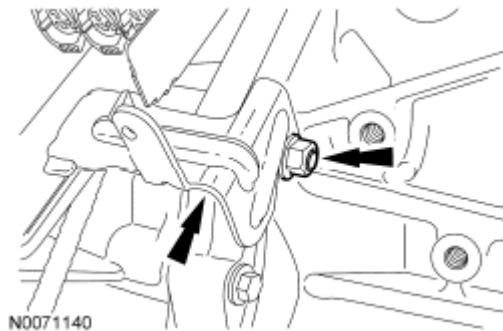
Locating HO2S And CMS Wire Connector Bracket And Nut
